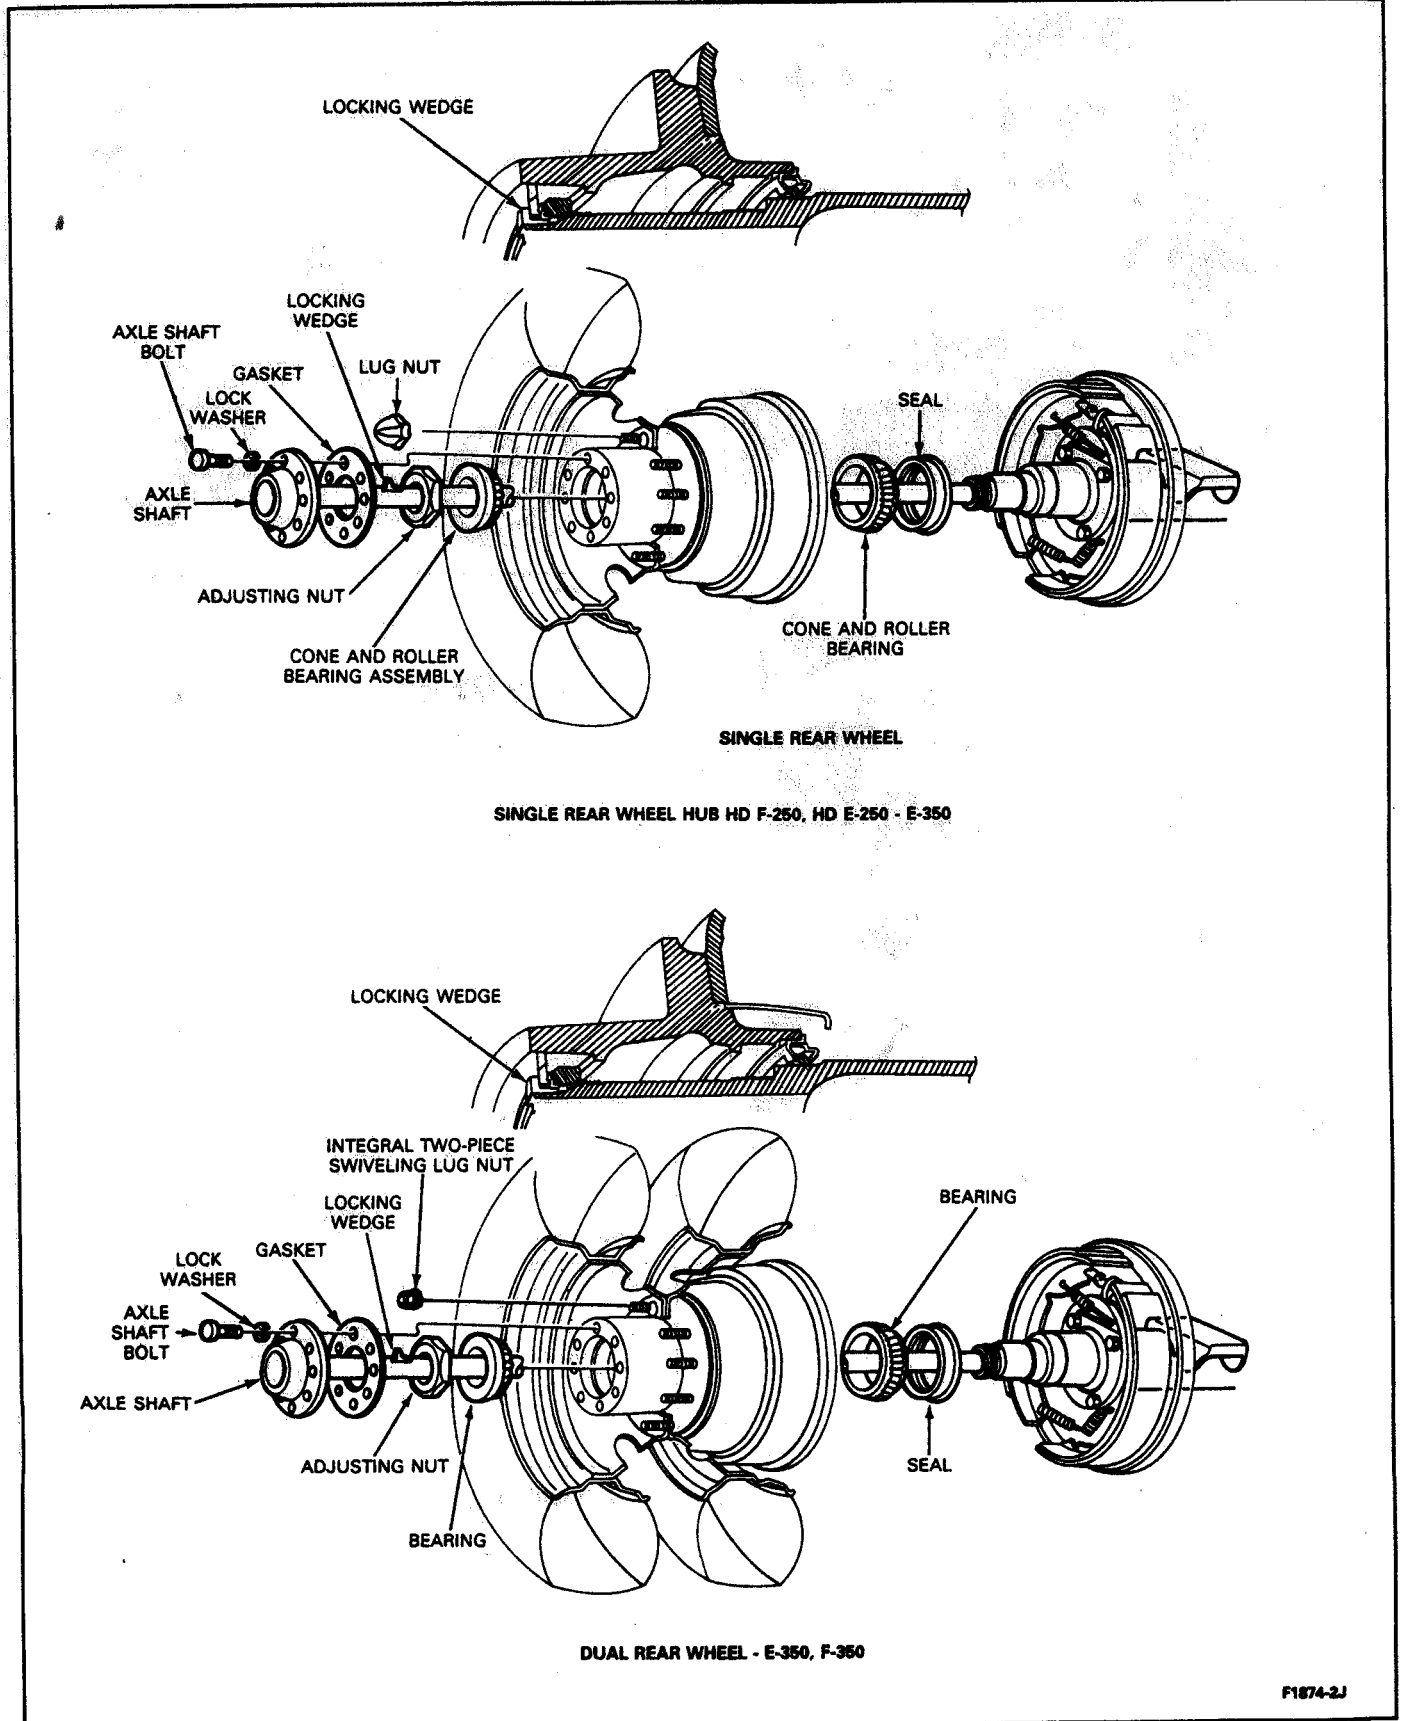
Rear Wheel Hub—Dana Floating Axle—HD F-250—F-350, HD E-250—E-350
